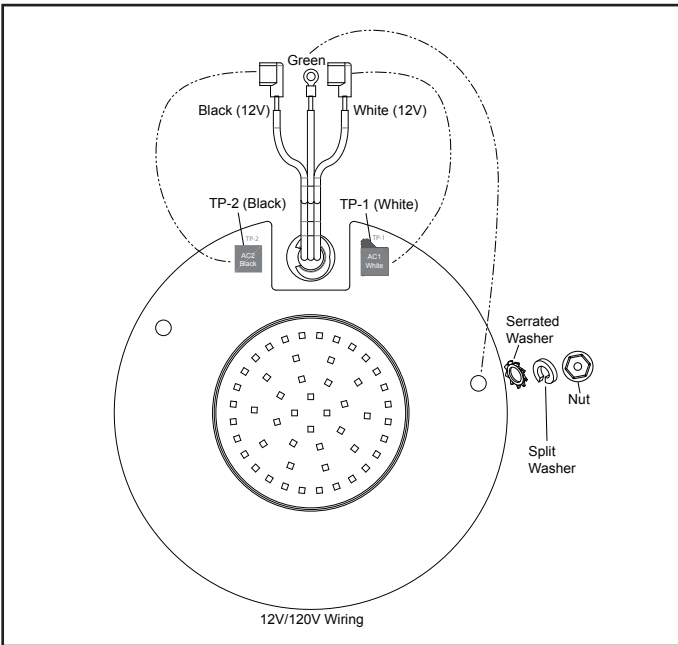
Large Light Engine (PCB) Replacement and Wiring
